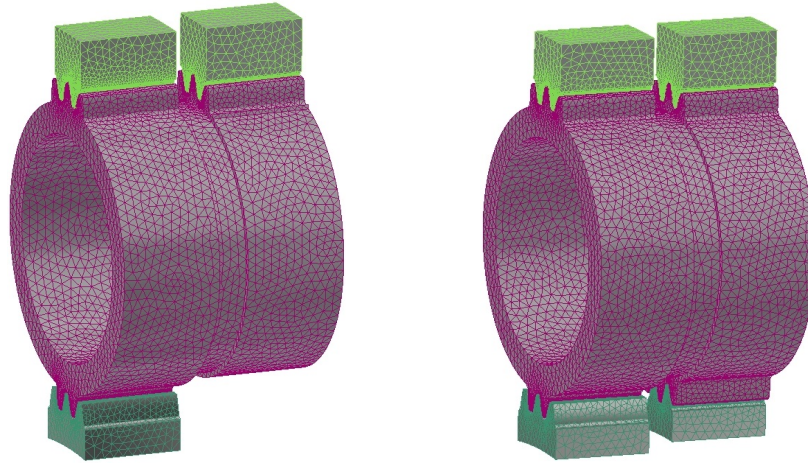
FEA model and mesh of Wolfrom gearbox (on left) and bearingless planetary gearbox (on right). For both gearboxes, the sun and ring gears are constrained to rotate around their centers. A load of $25Nm$ is applied to both gearbox ring gears (supported by only one planet). The planet of the bearingless planetary gearbox is floating while the planet of the Wolfrom gearbox is constrained so that it may only rotate around its axis.
